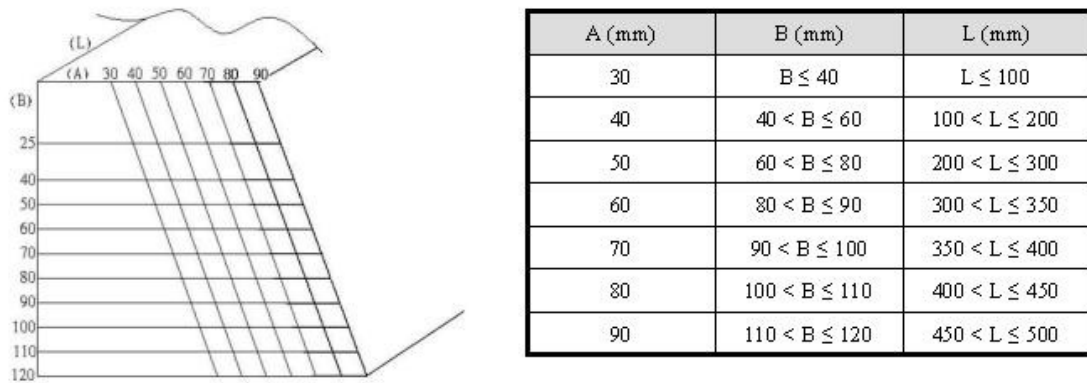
Dimensional design rules of a slider body (Courtesy: Luen Shing Tools Limited)
